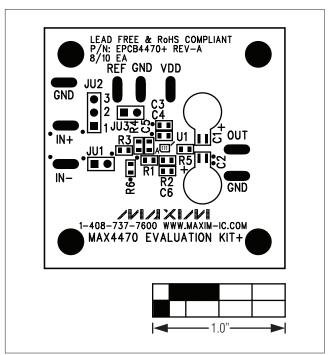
MAX4470 EV Kit Component Placement Guide—Component Side
